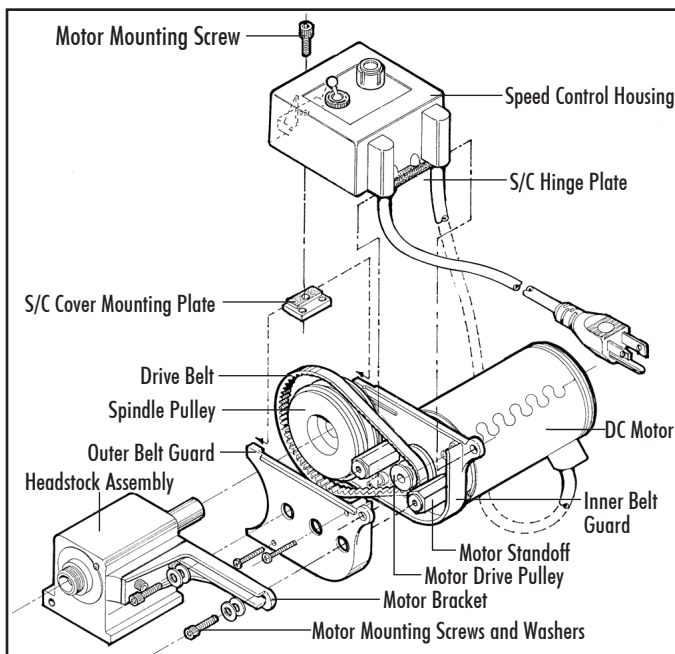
An exploded view seen from the “back” side shows the individual components. The inner belt guard, motor pulley and motor standoffs have already been assembled in this drawing. The motor bracket has also been mounted to the headstock. The following instructions and photos will walk you through the assembly procedure from start to finish.
